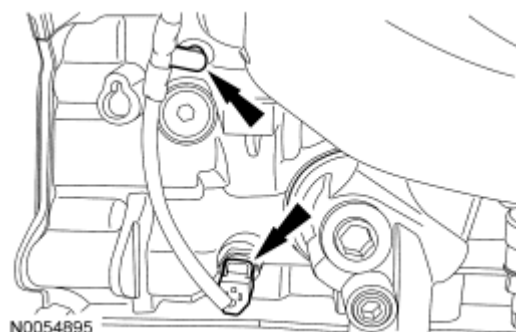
Locating Engine Oil Pressure (EOP) Switch Electrical Connector & Wiring Harness Pin-Type Retainer
